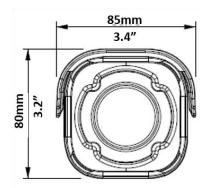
CB-3102-01-I Fixed Focal Frontal Dimensions
